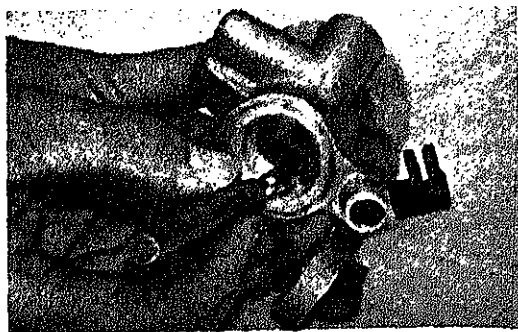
Cleaning the four small holes in the carburettor seat with the cleaning needle 1600 0294-82, which is supplied with the machine.
